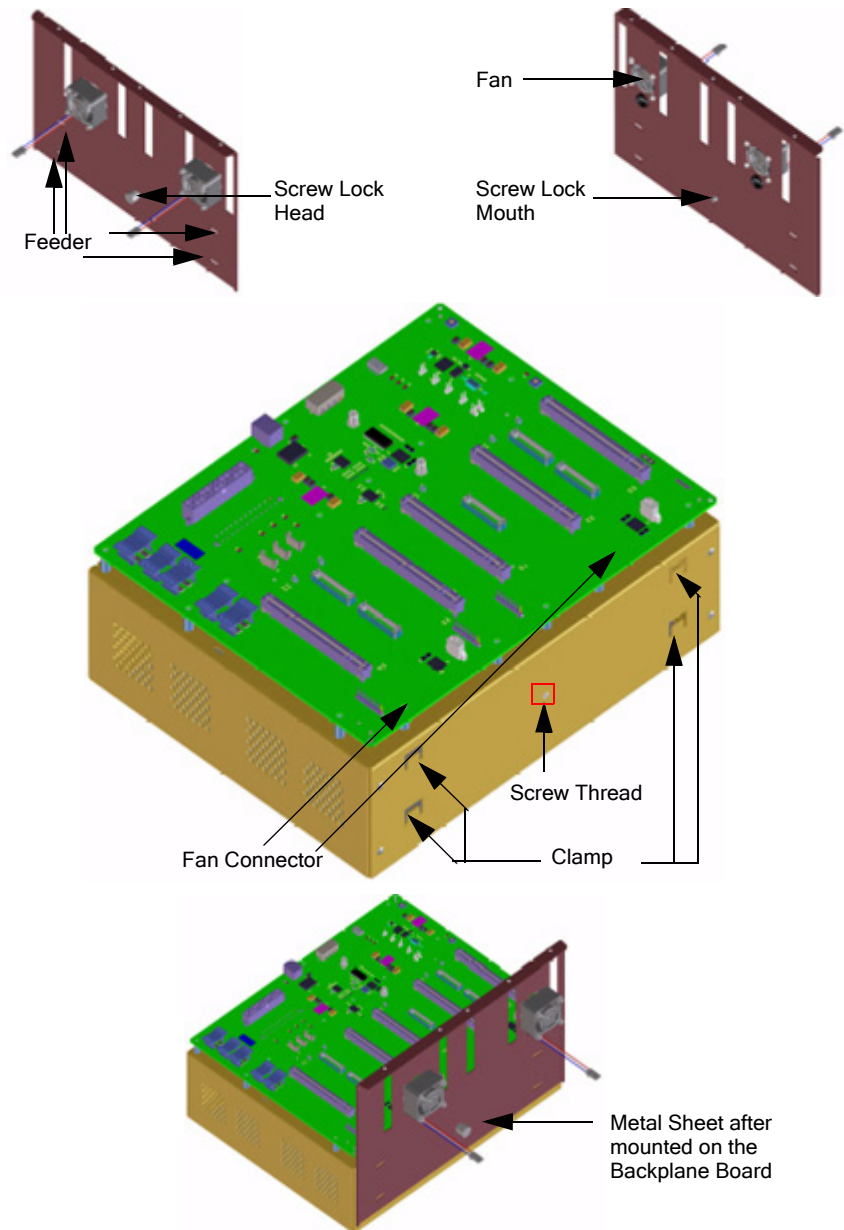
Mounting Metal Sheet on the N5316A Backplane Board
